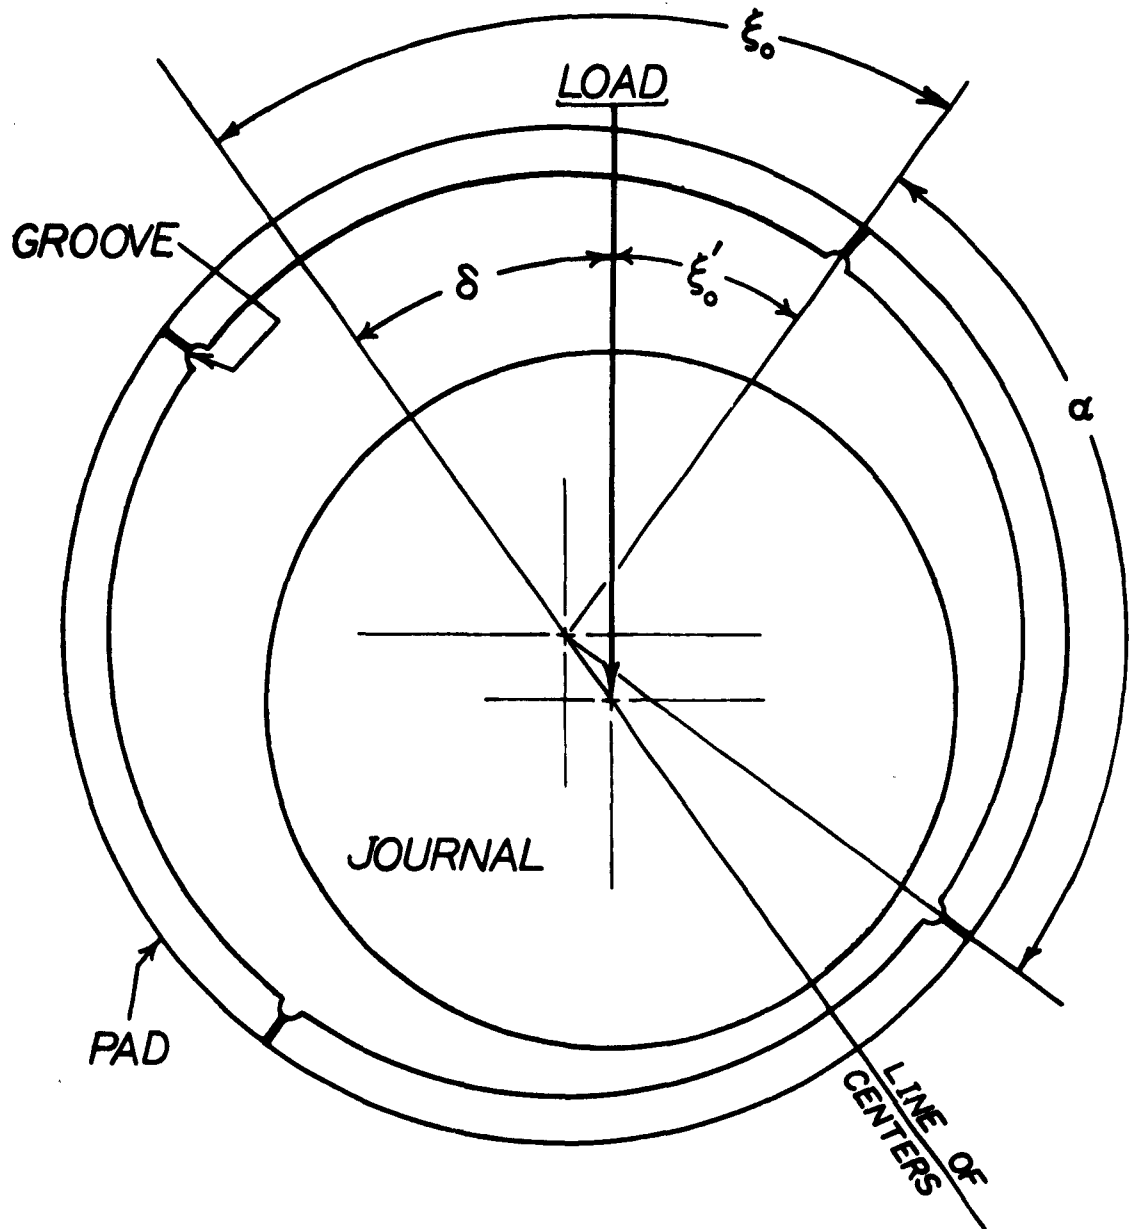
AXIAL GROOVE BEARING GEOMETRY
